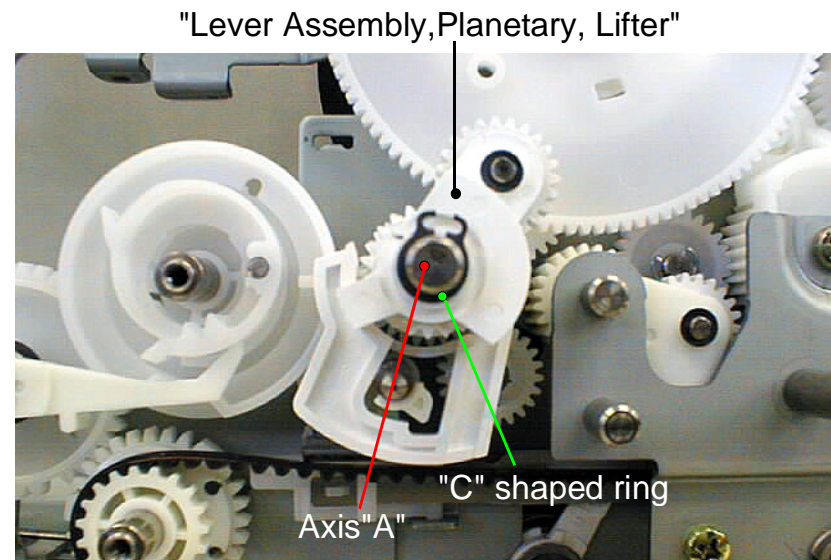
Installing "Lever, Assembly, Planetary, Lifter"
